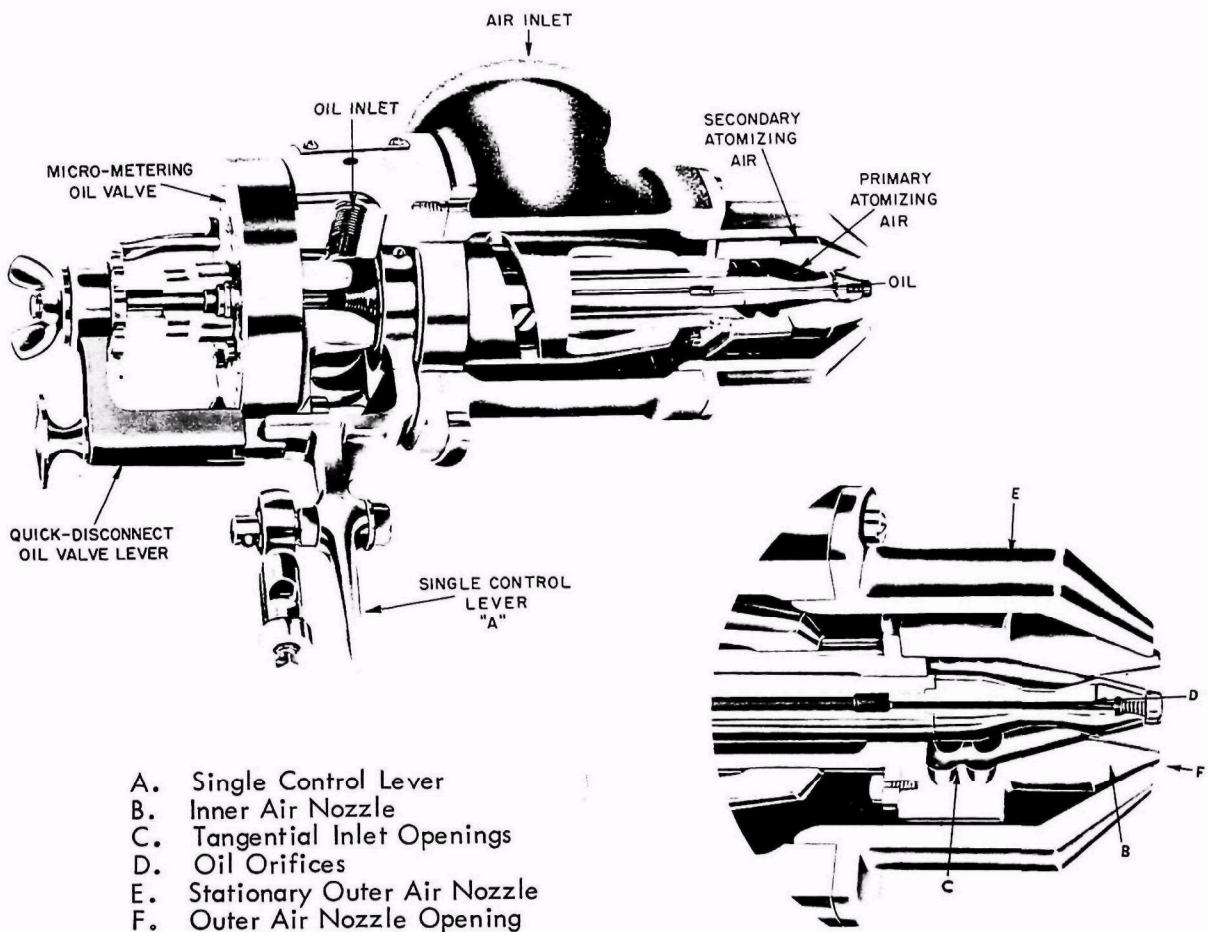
Sectional View of Hauck Proportioning Oil Burner and Magnified View of Nozzle Section
